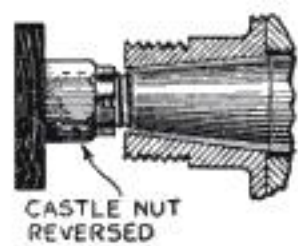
An emergency method of removing Ford rear wheel is to tap reversed castellated nut
